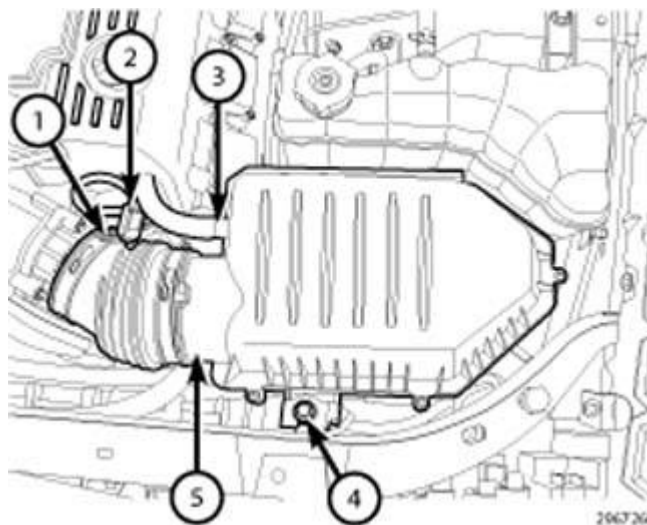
Air Duct Retaining Clamp, Intake Air Temperature Sensor Electrical Connector, Makeup Air Hose, Bolt & Air Cleaner Housing
